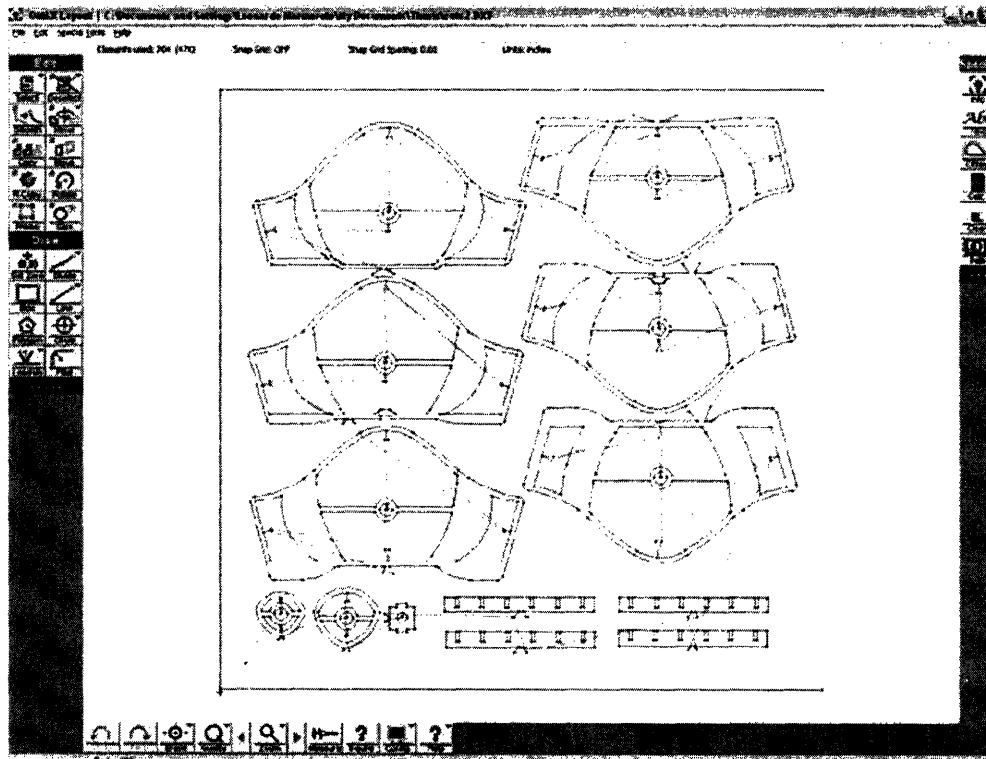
View of the OMAX Layout program used to create the waterjet tool path profile necessary for the manufacturing of individual parts contained in the F-35A scaled model.
